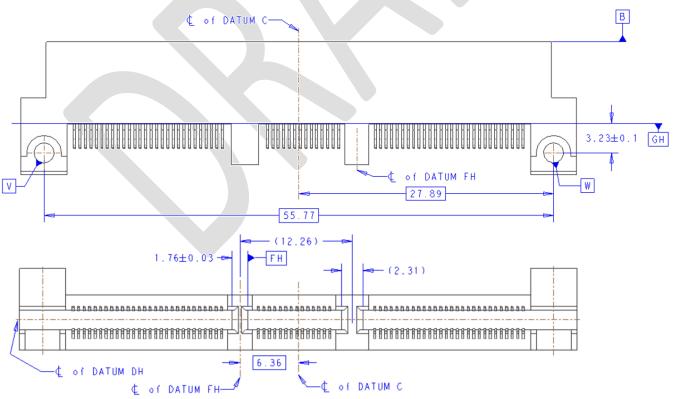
4C STRADDLE MOUNT CONNECTOR DIMENSIONS - REAR VIEW (MM)
